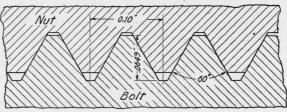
Section of the American National coarse thread for a bolt having a diameter of ¾ inch.
